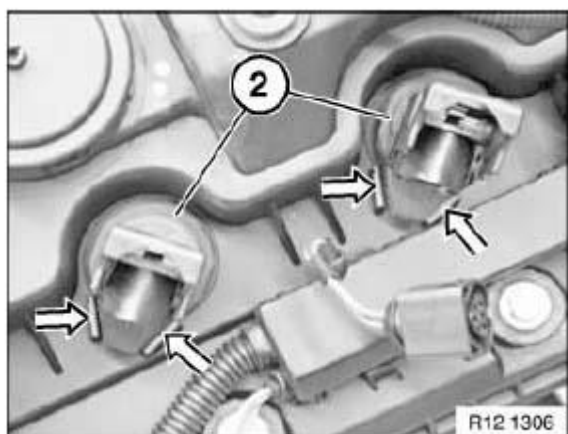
Inserting Rubber Seal On Ignition Coils Between Guides
